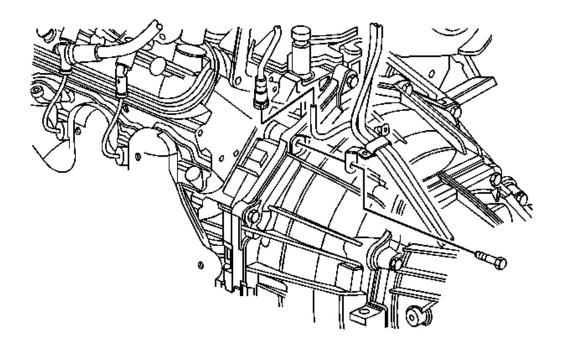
View Of Fuel Line Bracket & Bolt Courtesy of GENERAL MOTORS CORP.
